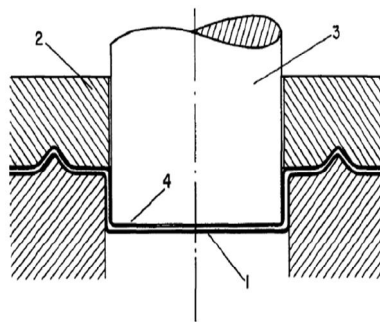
Flat bottom punch 3, used to indirectly apply pressure to a specimen 1, through a circular washer 4, deforming the material in-plane. The sample and washer are clamped rigidly in a die, 2 [17].
